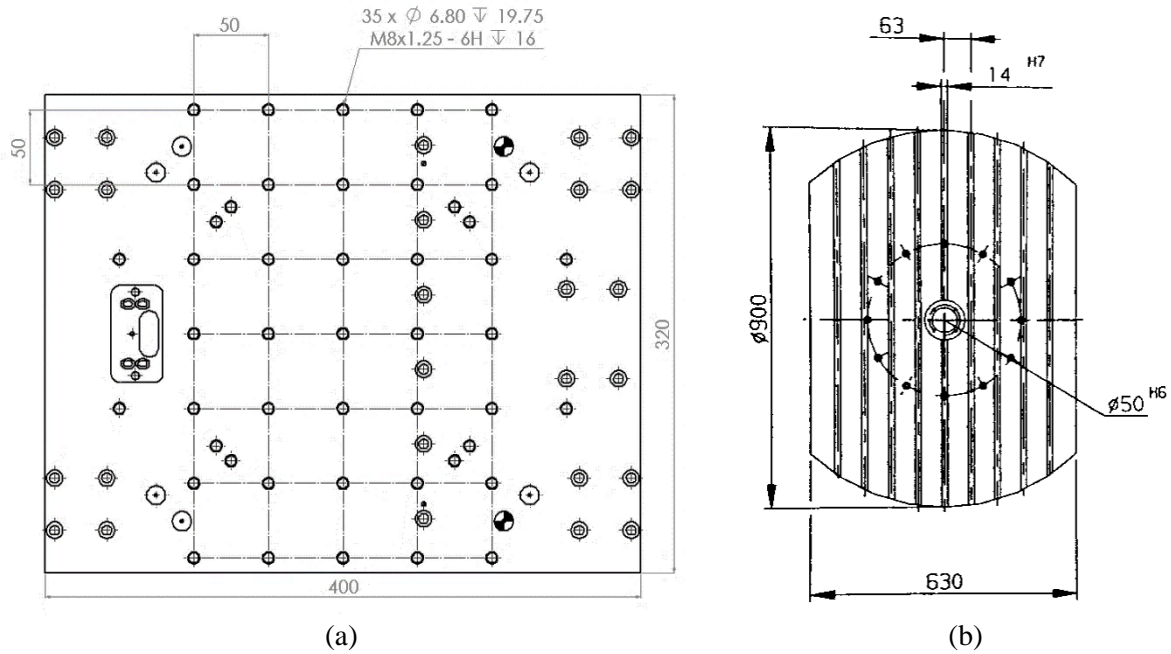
Table dimensions for (a) PMT stage [mm], (b) Deckel Maho machining center [mm] [60]
